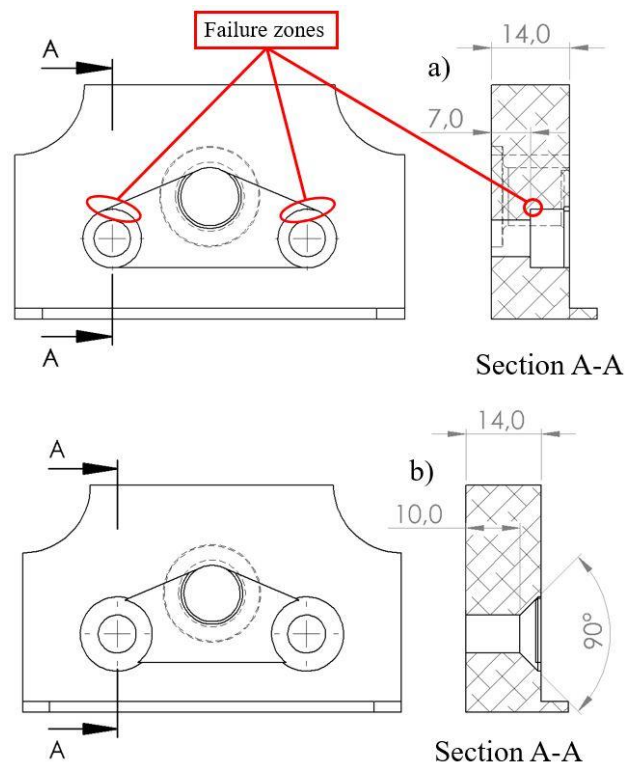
Section view with shape of screw heads: (18a) counterbore screw section of the component currently in use; (18b) section of alternative countersunk screw.
